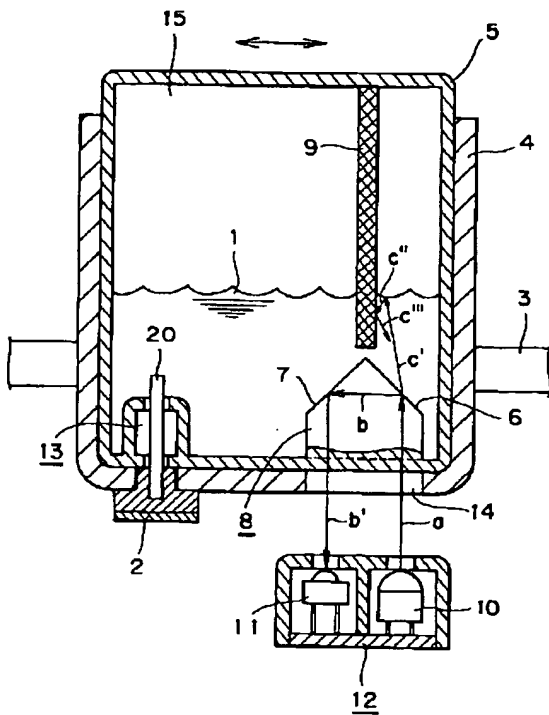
It is a sectional view explaining the example of use of the conventional example.
